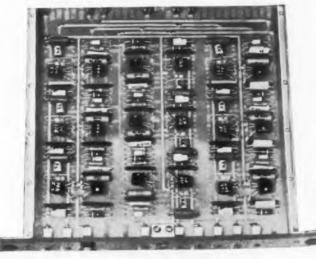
Typical printed wiring assembly. Volumetric efficiency is only 3.2%.
